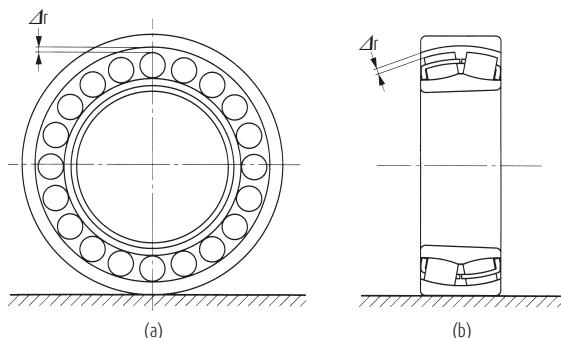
Clearance Measurement Point (Bearing Outside Diameter: Less Than 200 mm)
